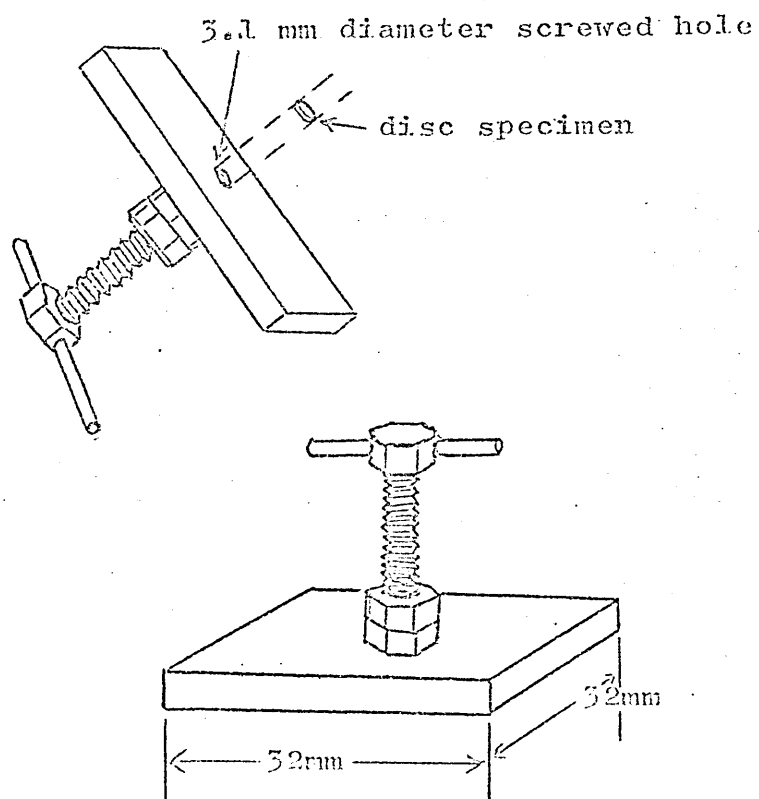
jig used for grinding thin disc specimens on 600-800 grit paper.
